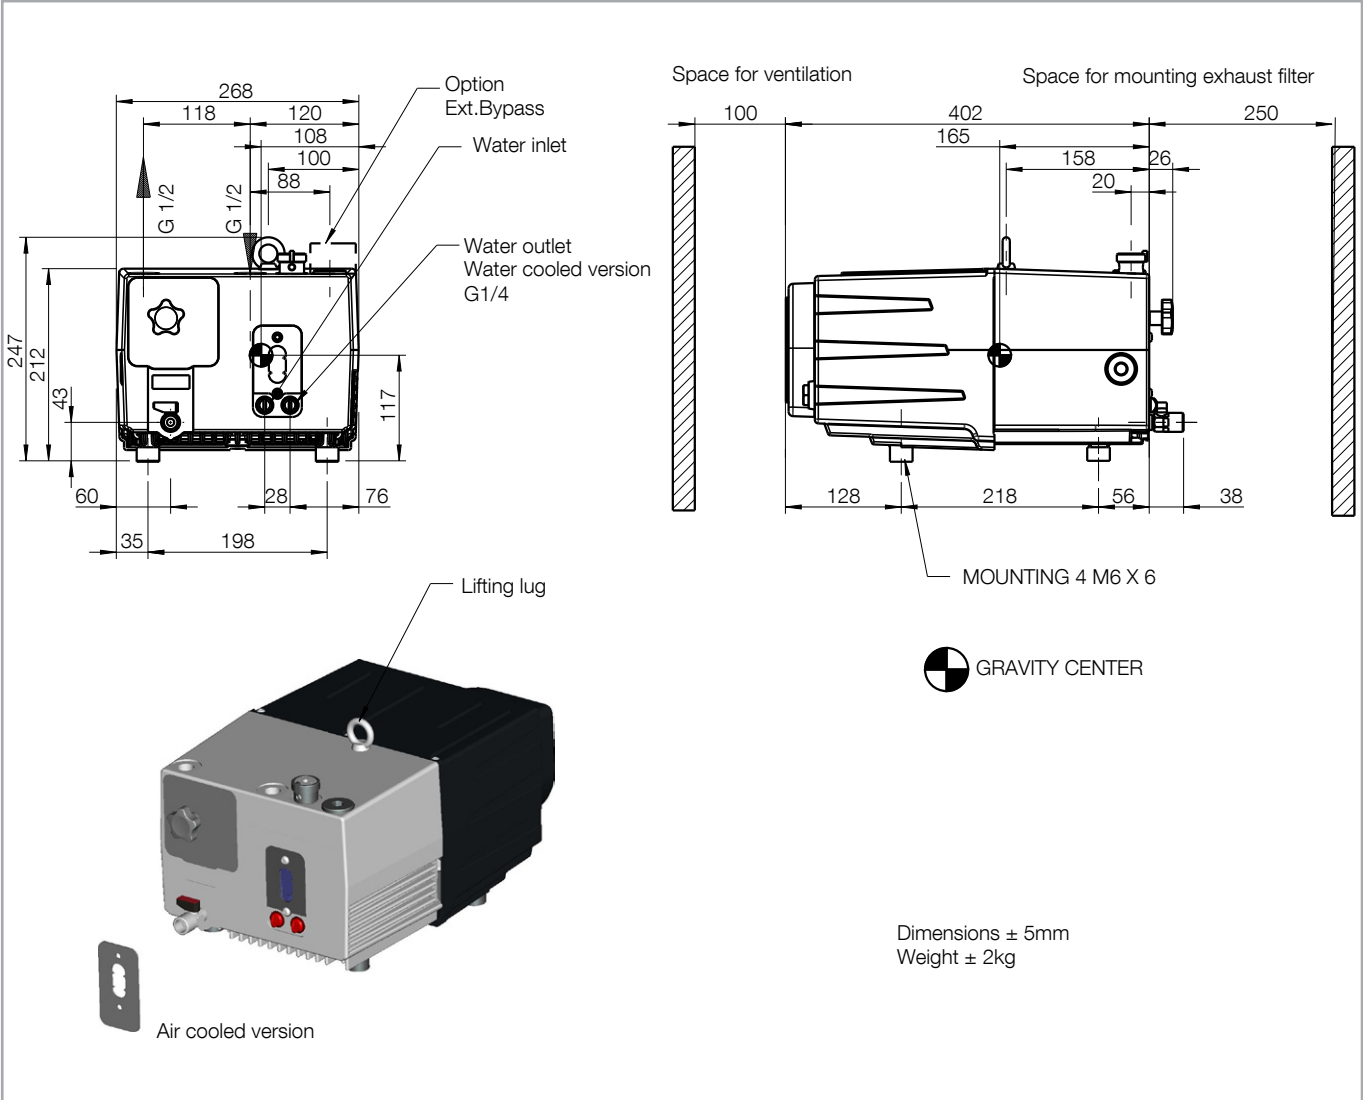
Dimensional drawing of SV16 D and SV25 D
